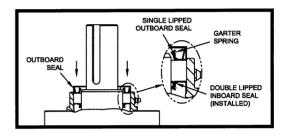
Orientation of Outboard Seal for Installation
